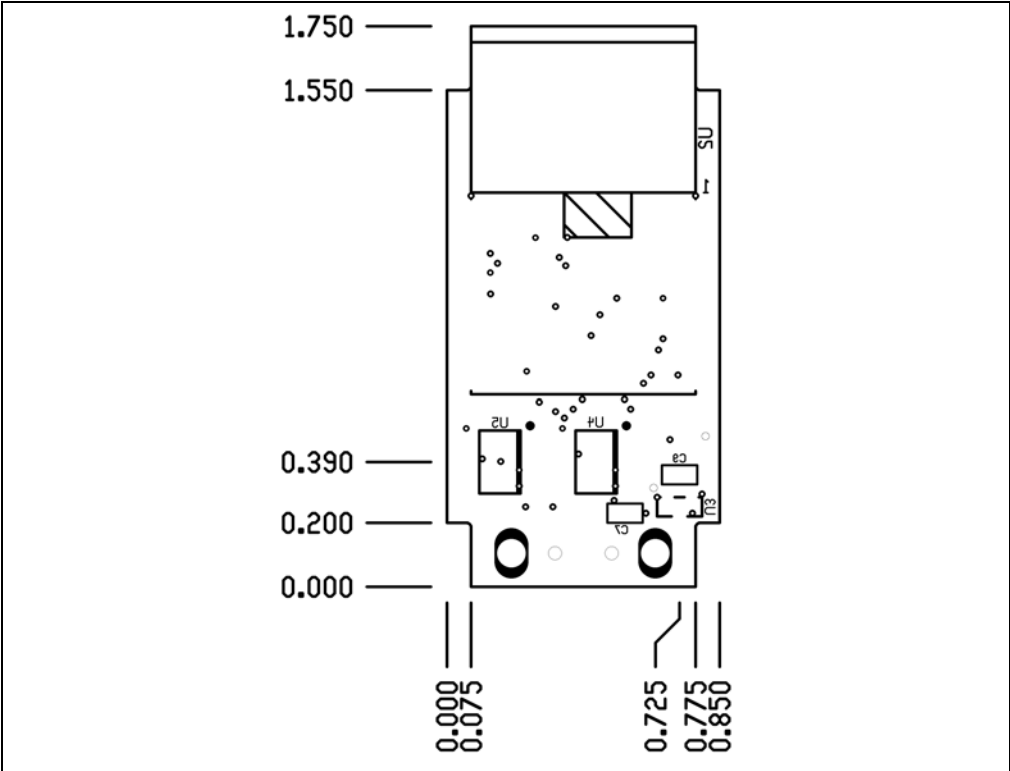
LAYER 4 — BOTTOM COPPER
